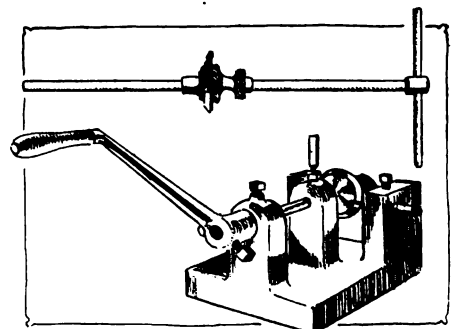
American valve grinder for quickly resurfacing valves and seats
